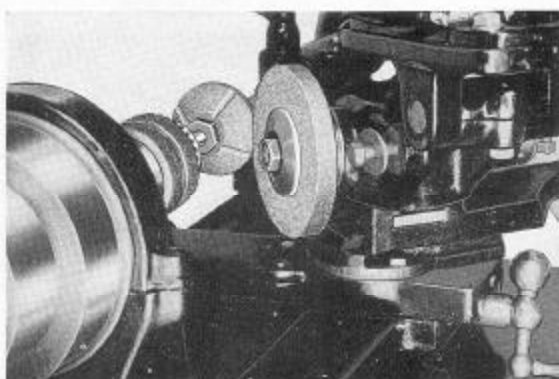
Truing a Valve Seat Hone by Grinding in the Lathe. Valve seat hones can be trued at any angle by using the grinder as shown in Fig. 11. The diamond dresser may also be held in the tool post and fed across the hone while it is held in lathe chuck, for truing.
